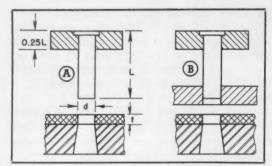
(A) For checking punch height, the universally known Formula II of Euler is employed. (B) Guide the punch in a slip-fit bushing placed in the stripper.
